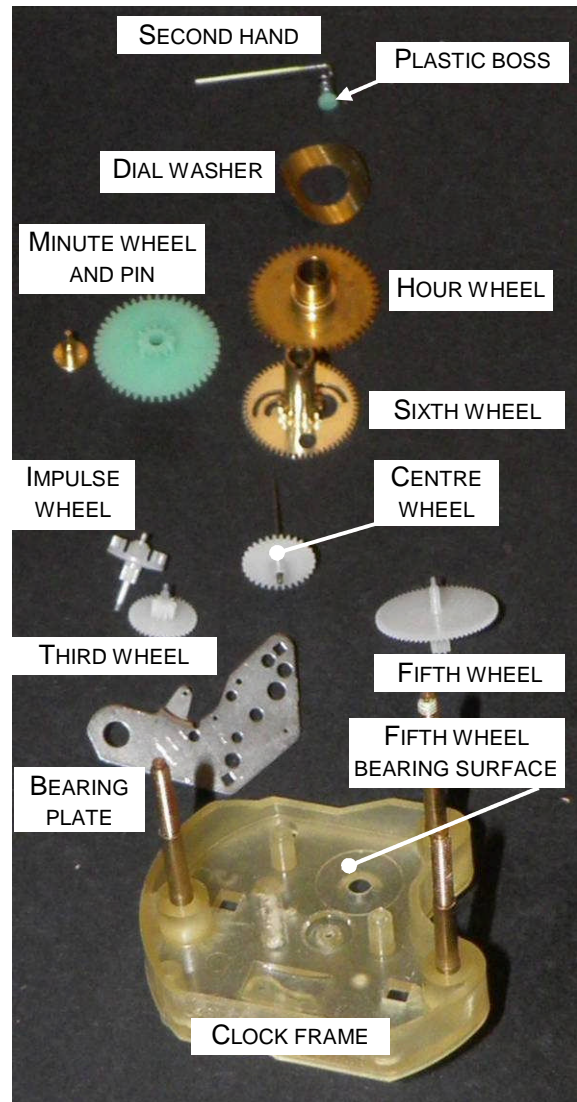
Showing the components of the transistor impulse clock gear train.
